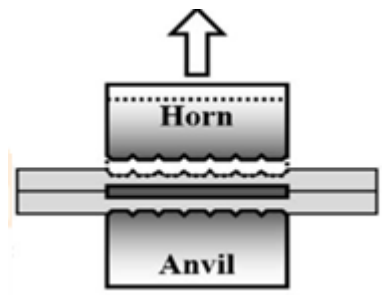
Unloading/unclamping the ultrasonic welded sheet metals
